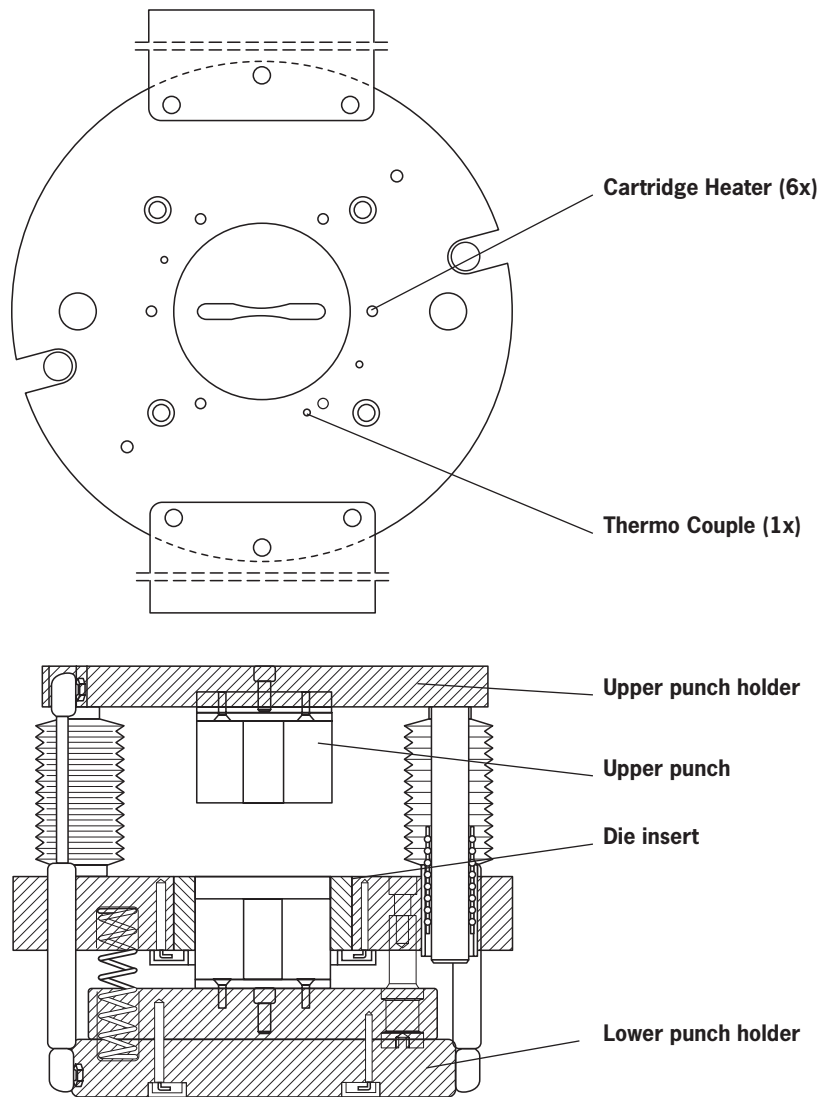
Fatigue bar pressing tool at Höganäs AB.
